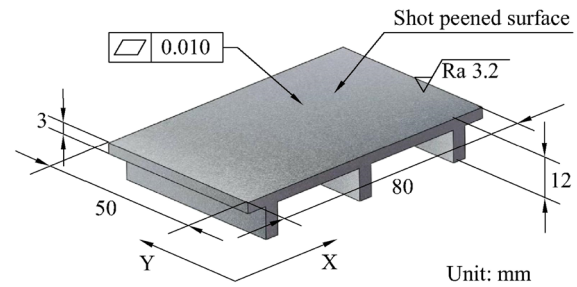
Shape, size, and tolerance of the specimen.
